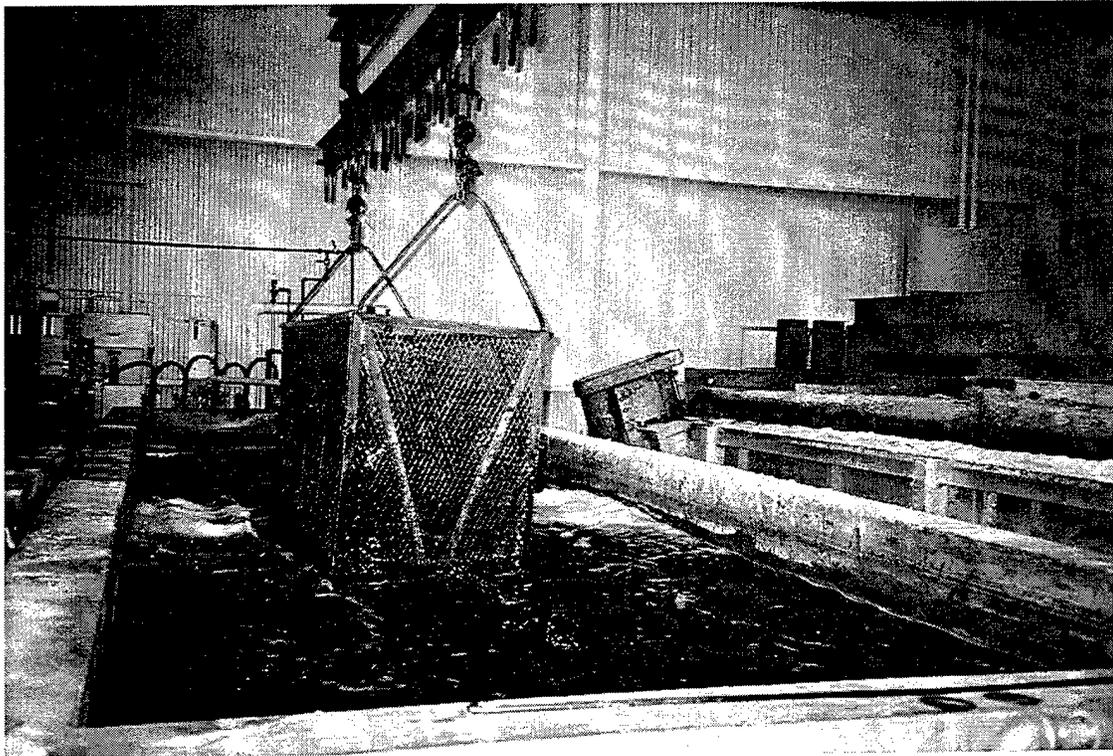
Soiled panels lowered into aqueous immersion cleaner.
